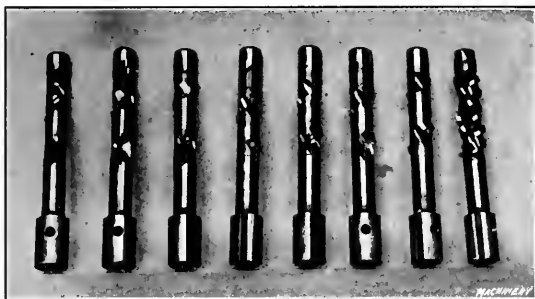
Set of Eight Taps used in Fixture shown in Fig. 1
